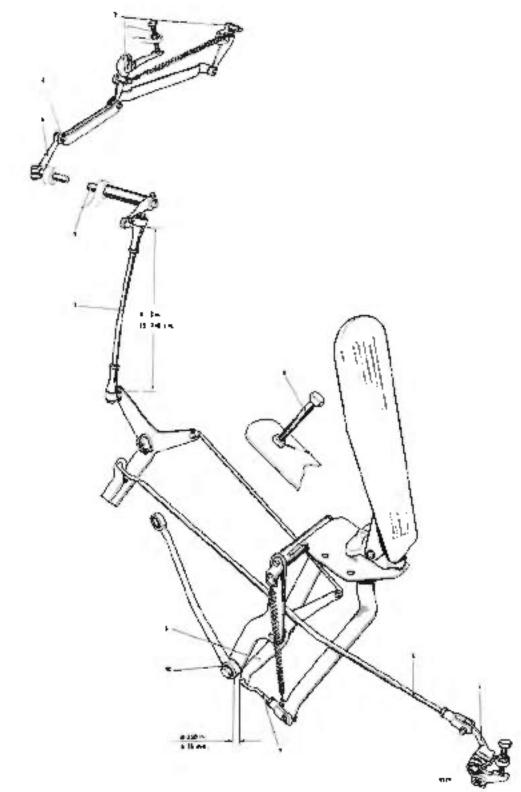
Throttle linkage left-hand drive -- inte S2 cars
